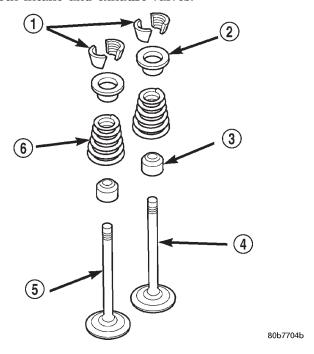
Valve and Keeper Configuration 2.5L Engine
